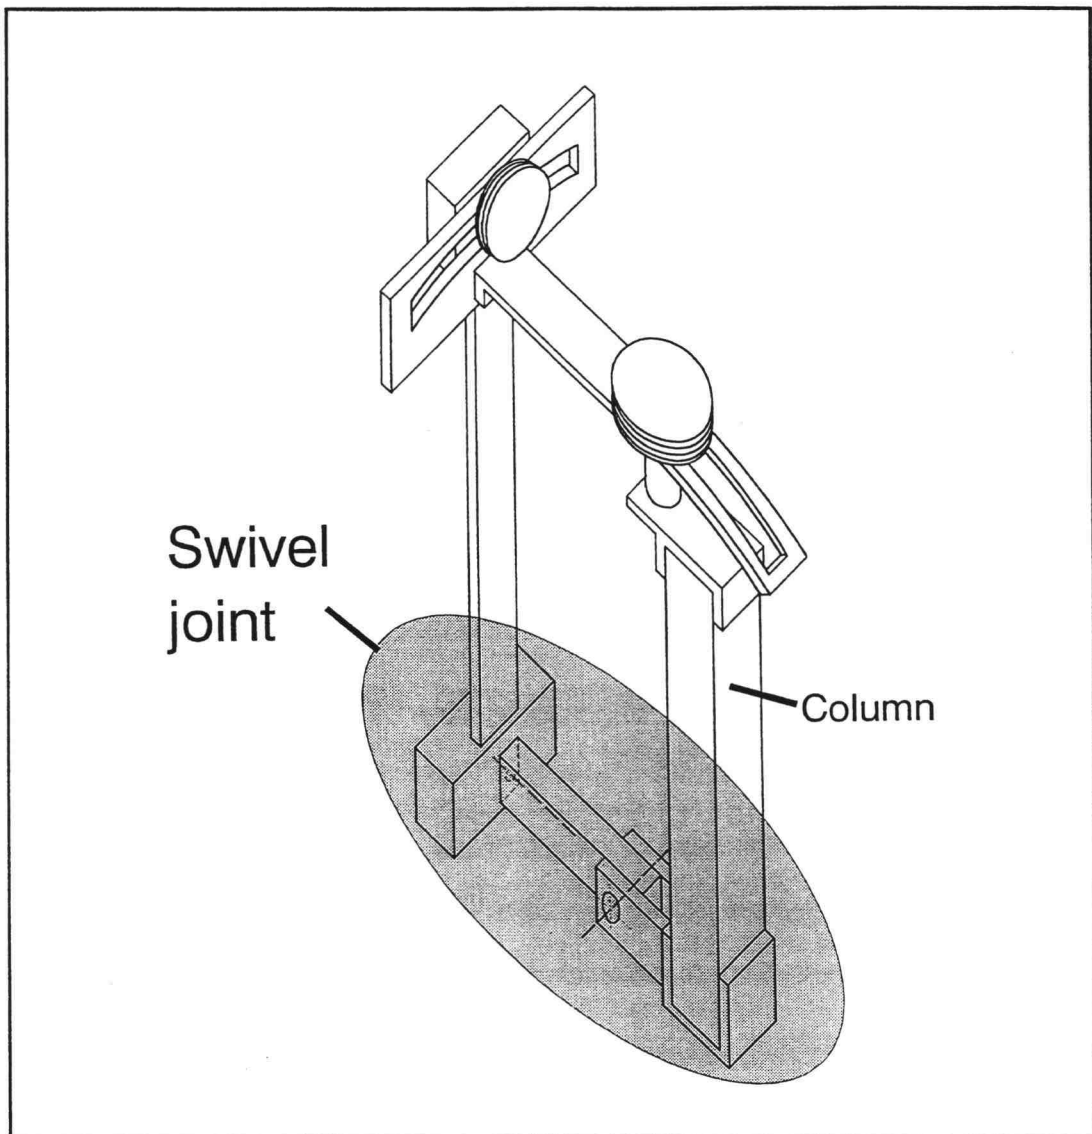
Experiment Swivel Joint Problem Assembly Drawing
